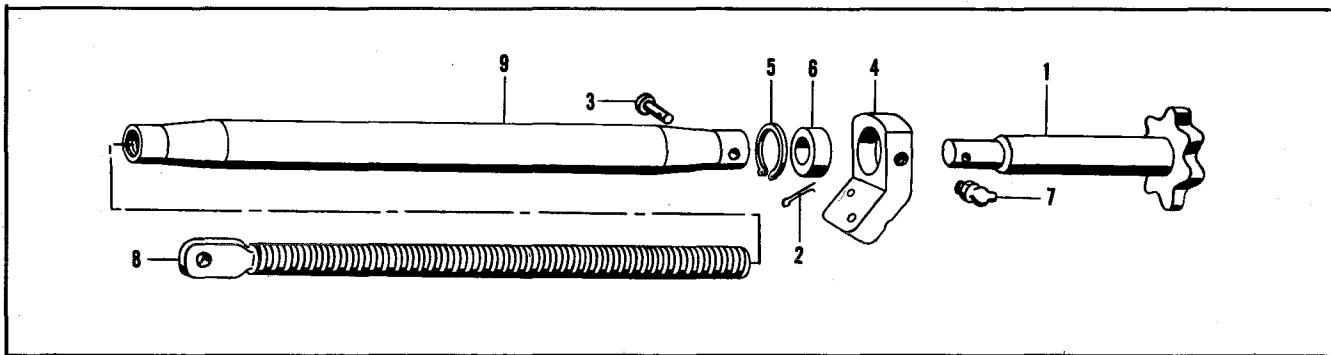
Rotation Adjustment Assembly, Part No. 101968
